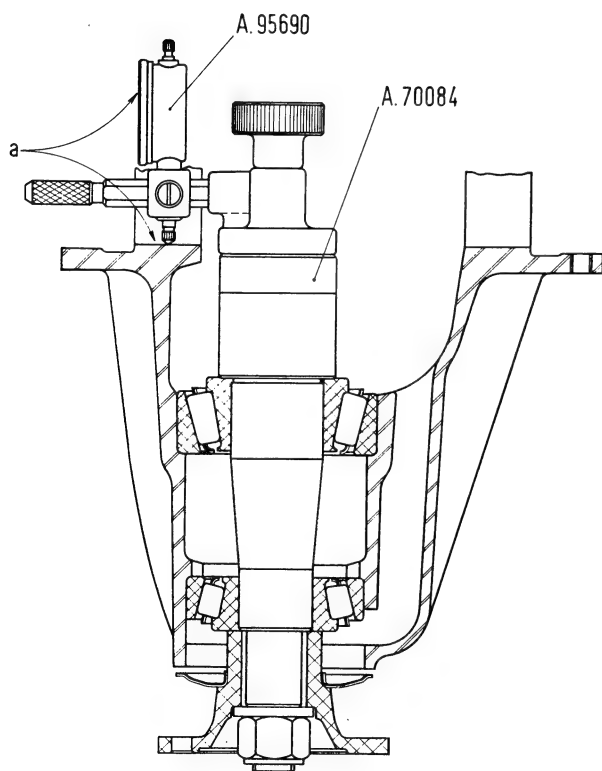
Diagrammatic view of how dummy pinion A. 70084 and dial indicator A. 95690 should be fitted to determine drive pinion rear bearing thrust ring thickness.
